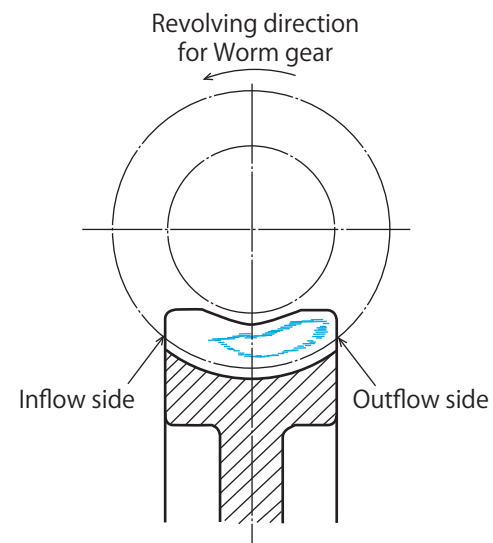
Inflow clearance for Worm gear pair {A few problems of lubricating oil for Worm gear pair and research work for machine. Volume 8, No. 4 (1956) written by Dr. Waguri and Dr. Ueno from Yokendo Co. Ltd.}
